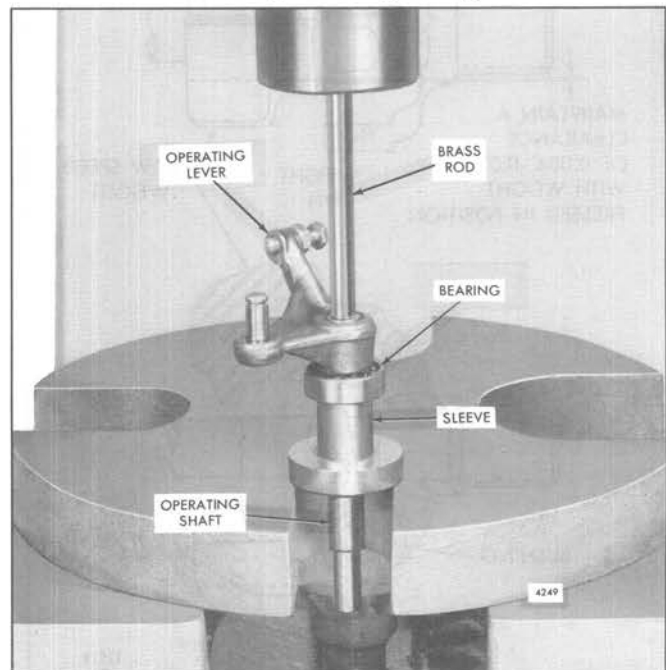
Removing Operating Lever and Upper Bearing From Operating Shaft
